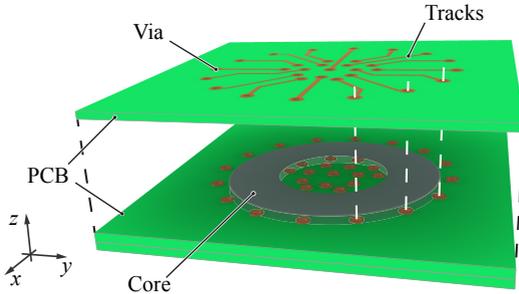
PCB-integrated core; windings are realized with PCB tracks and vias.
